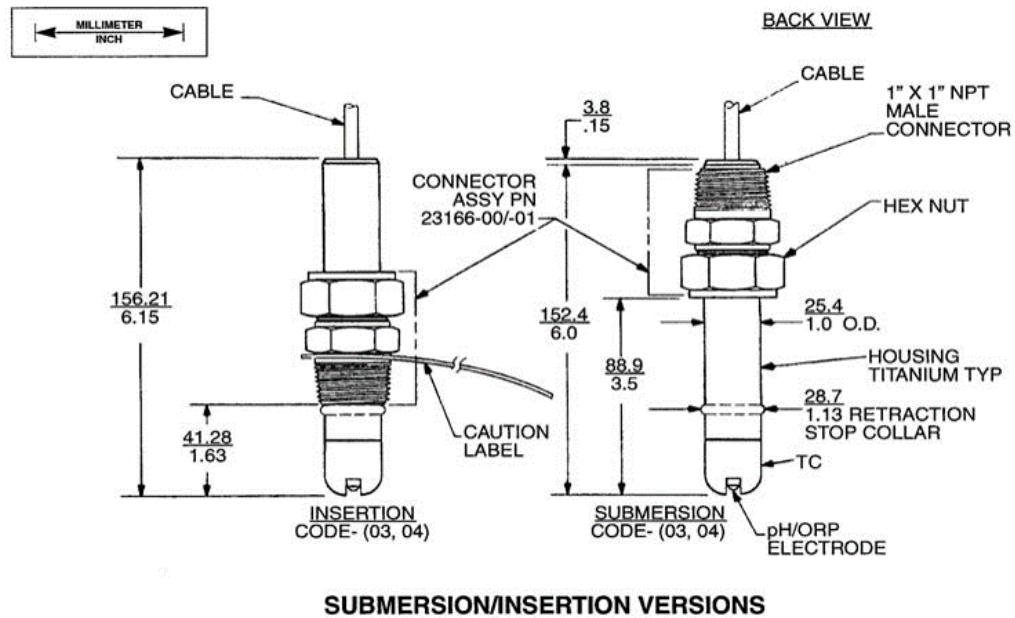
Dimensional drawing for submersion/inversion version (code -03, -04)
